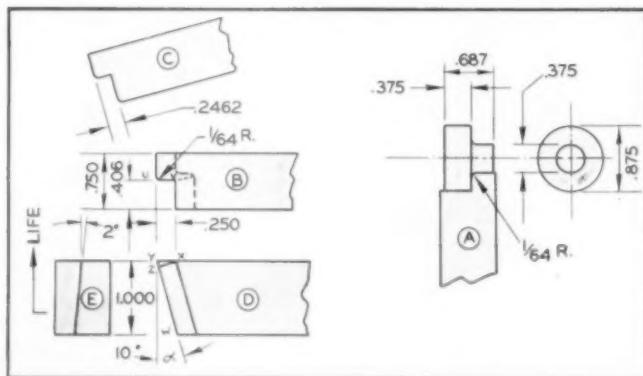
is a typical hand screw machine part. At right is the form tool to finish the diameters and face the shoulder.
